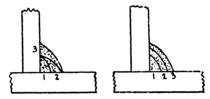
A multi-layer flat, vertical or overhead fillet weld cross section
